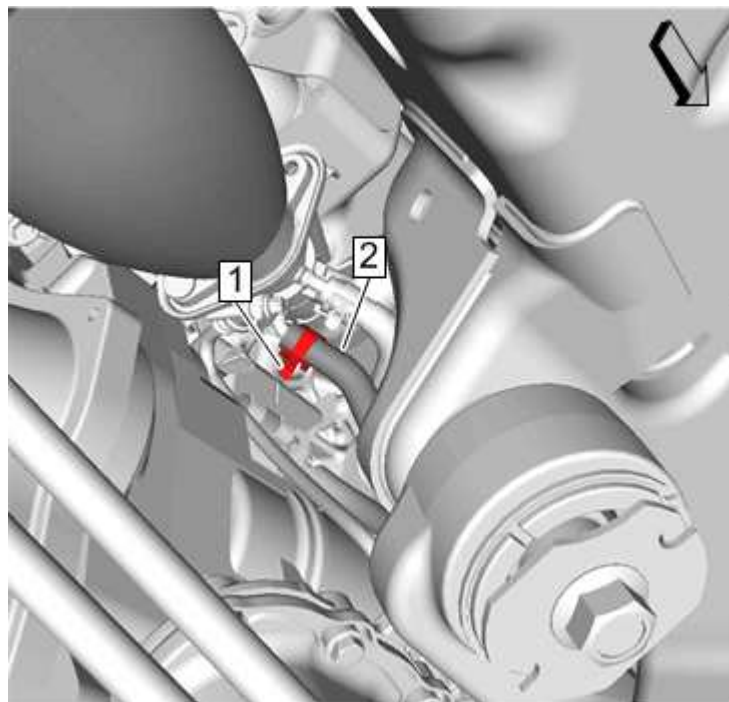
Emission Reduction Fluid Injector Outlet Hose And Injector
